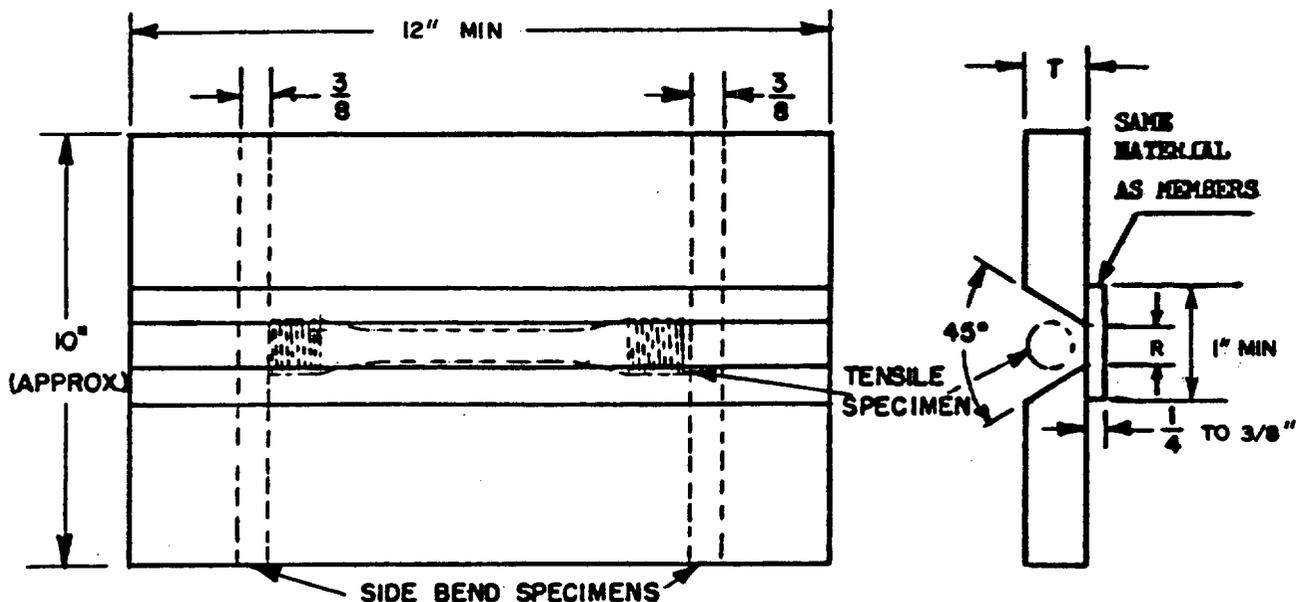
Weld joint for mechanical properties tests for types MIL-80S-1, MIL-80S-2, and MIL-80S-3, MIL-80S-1F, and MIL-80S-2F.
